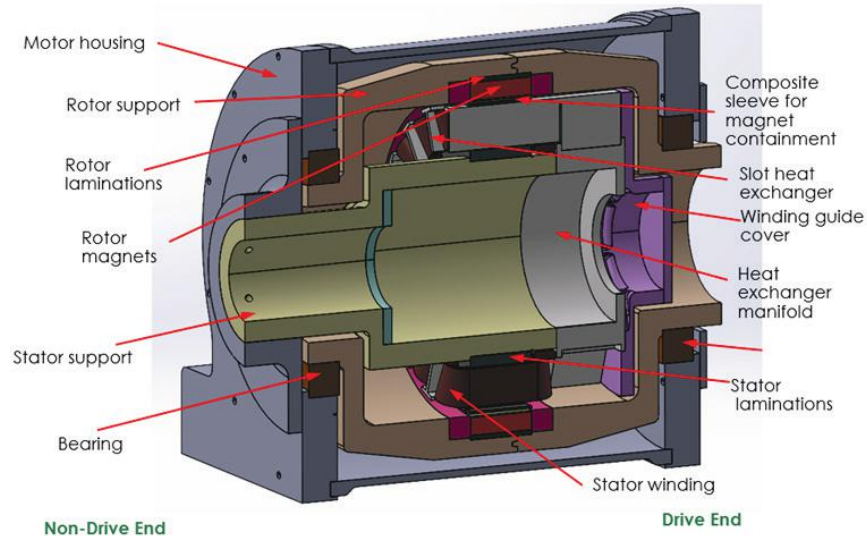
Design #1, supported on both sides. The ability to remove the power electronics converter post assembly is lost.
